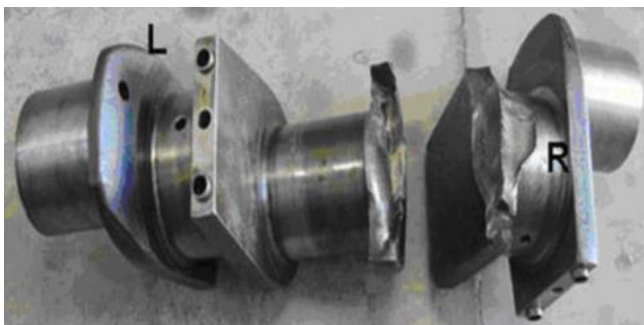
(a) Fracture Surface in the Crankshaft;
